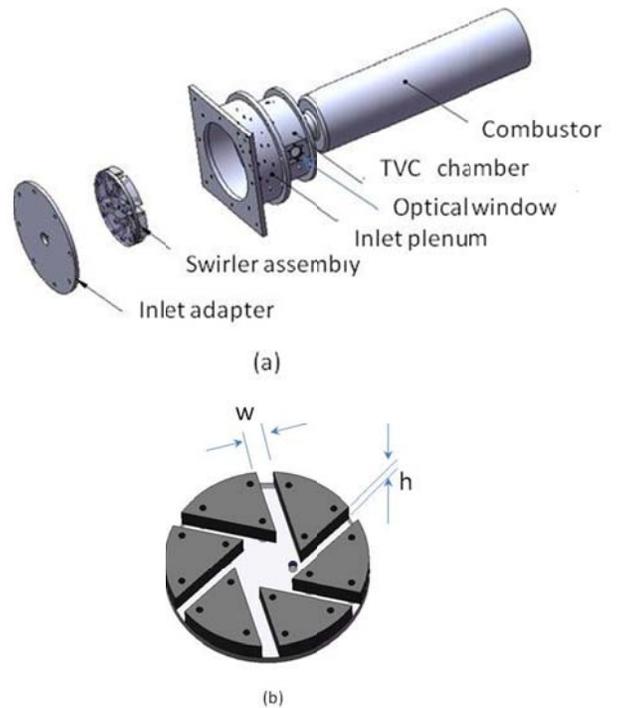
Modular Rig Design: (a) view of exploded combustor assembly and (b) radial swirler configuration
